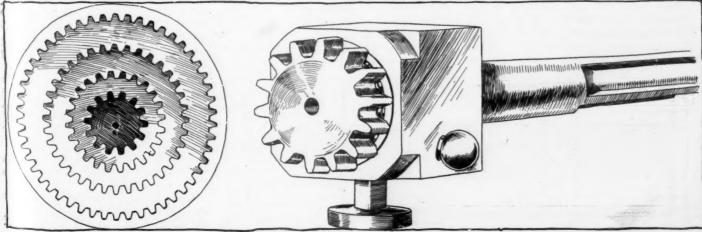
FRONT VIEW OF FOUR-SPEED DRUM FIG. 6-ENLARGED VIEW OF DRIVE SHAFT AND PINION
